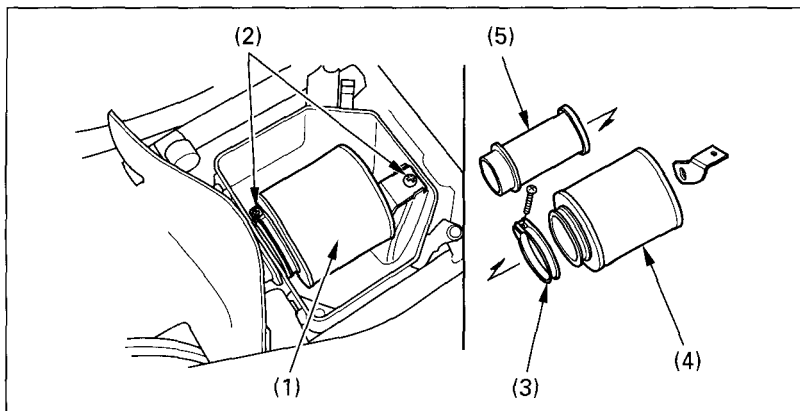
(1) Air cleaner assembly      (4) Air cleaner
